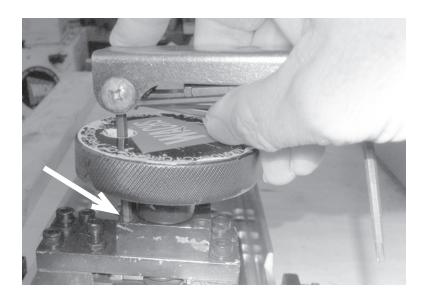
Use a hex wrench to remove the four screws in the end block. Rotate the feed knob to access each screw.
